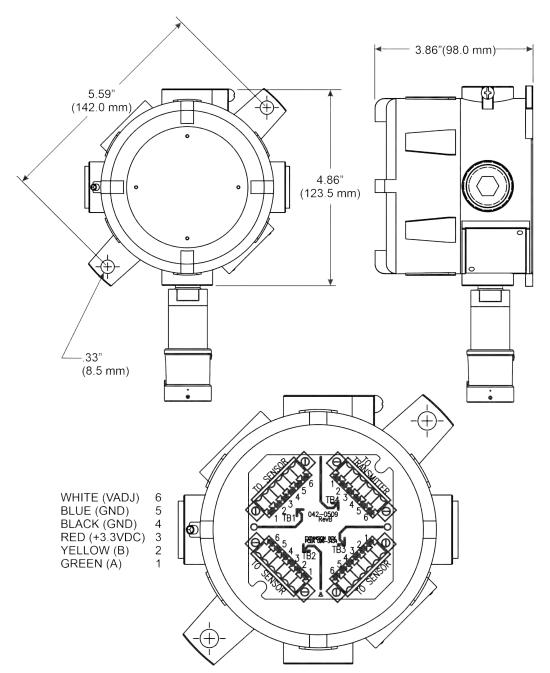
Meridian J-Box Assembly Wiring and Mounting – Stainless Steel
